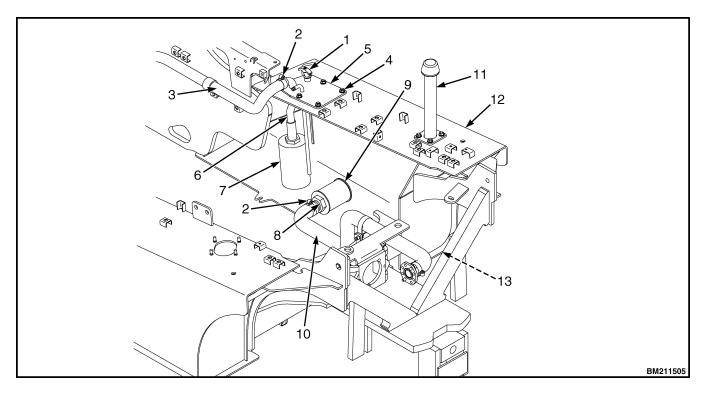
Sealant Pattern for Hydraulic Tank Cover and Filler Plate
